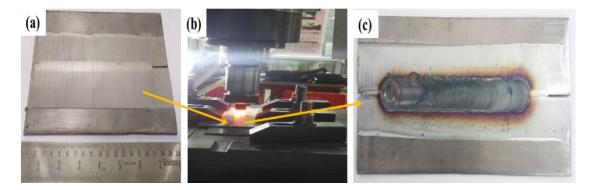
Photographs of the sequence of FSP of the welded plate: (a) welded plate after shaping operation, (b) performing FSP operation on the welded plate, and (c) FSPed welded plate.
